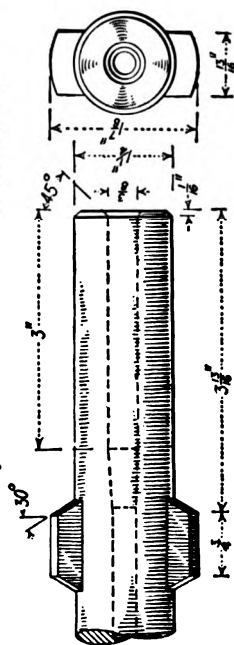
STANDARD LUGGED DRILL SHANK FOR MOUNTED HAMMER DRILLS
